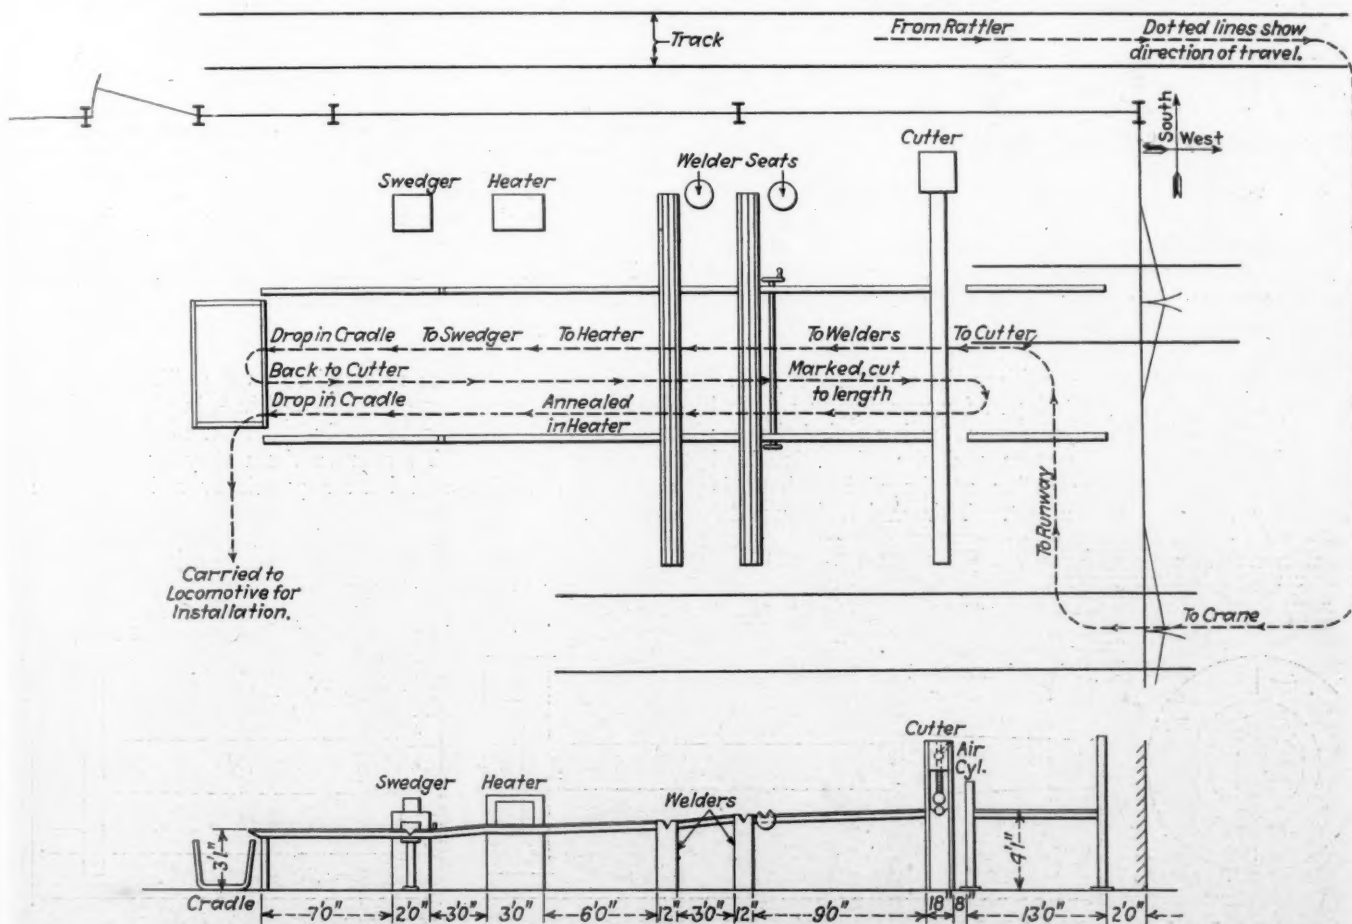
General arrangement of the flue shop and an elevation of the sloping runway
